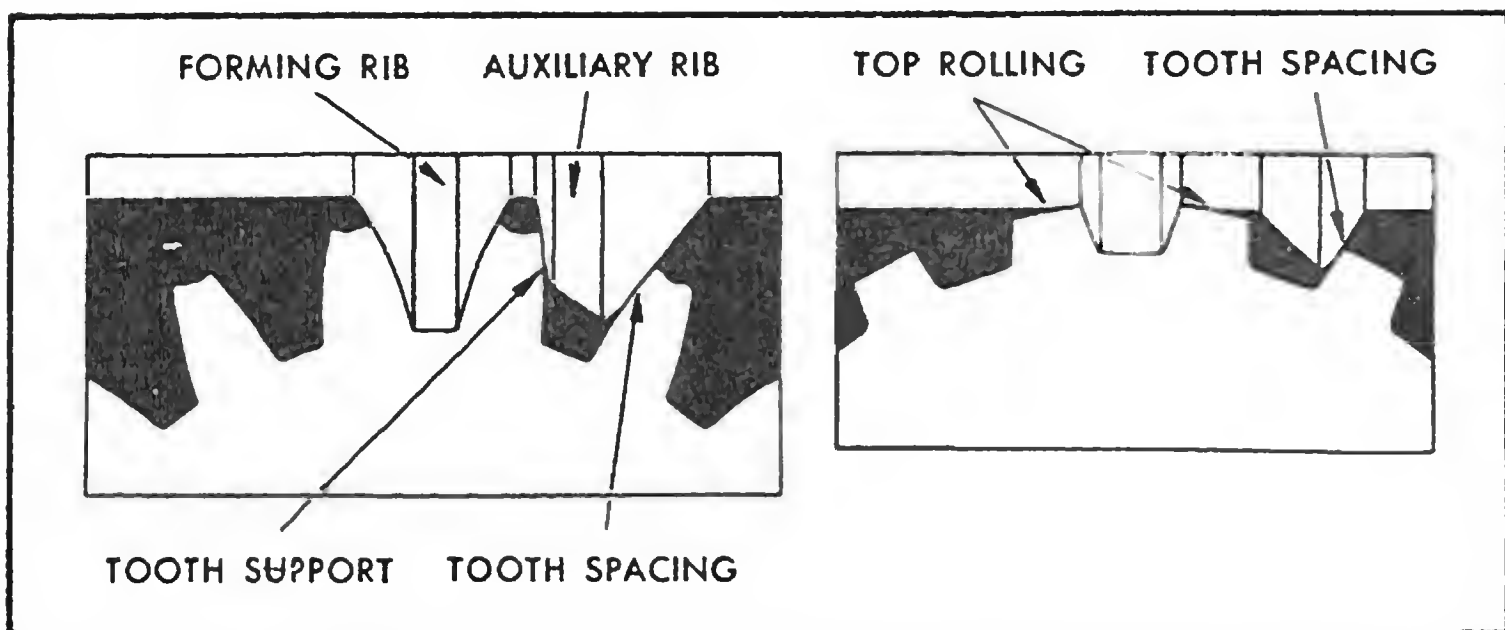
Forming Ribs on Rollers have Shape of Grooves to be Formed, and Auxiliary Ribs Insure Accurate Spacing and may Support Teeth against Bending
